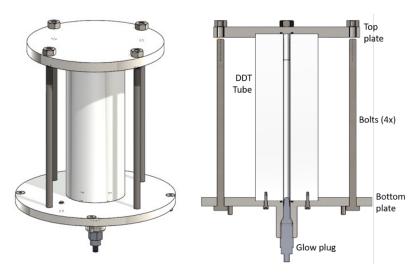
left: assembled thermal ignition fixture; right: cross sectional view of the thermal aging fixture.
